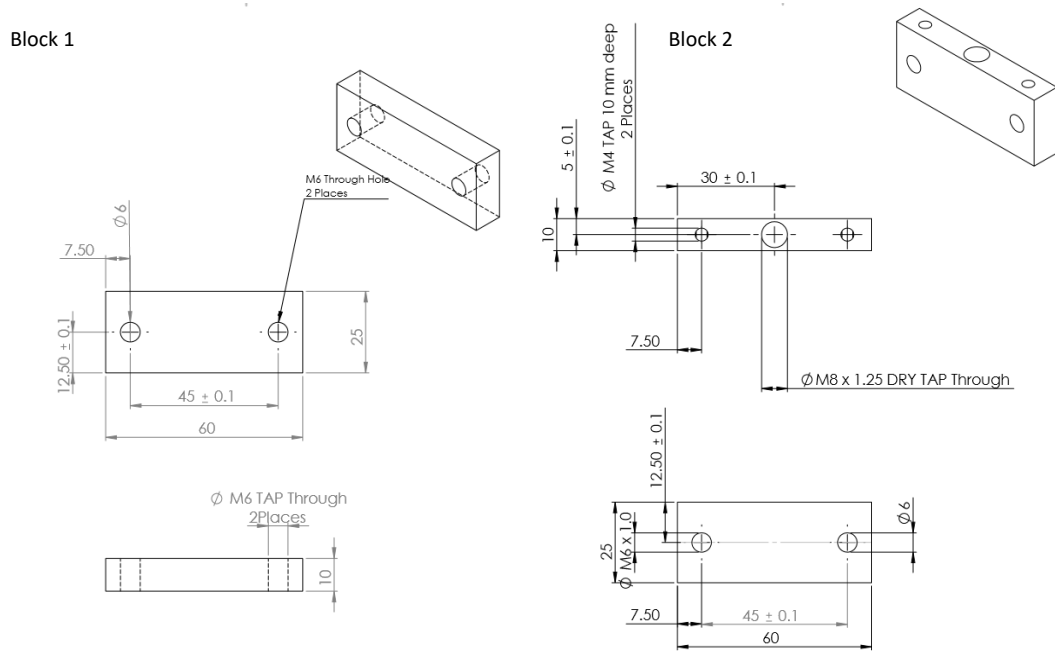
BRASS BLOCK DESIGN AND DIMENSIONS; TAPPED HOLES IN BLOCK 2 ALLOW FOR IN SITU EIS TESTING.
